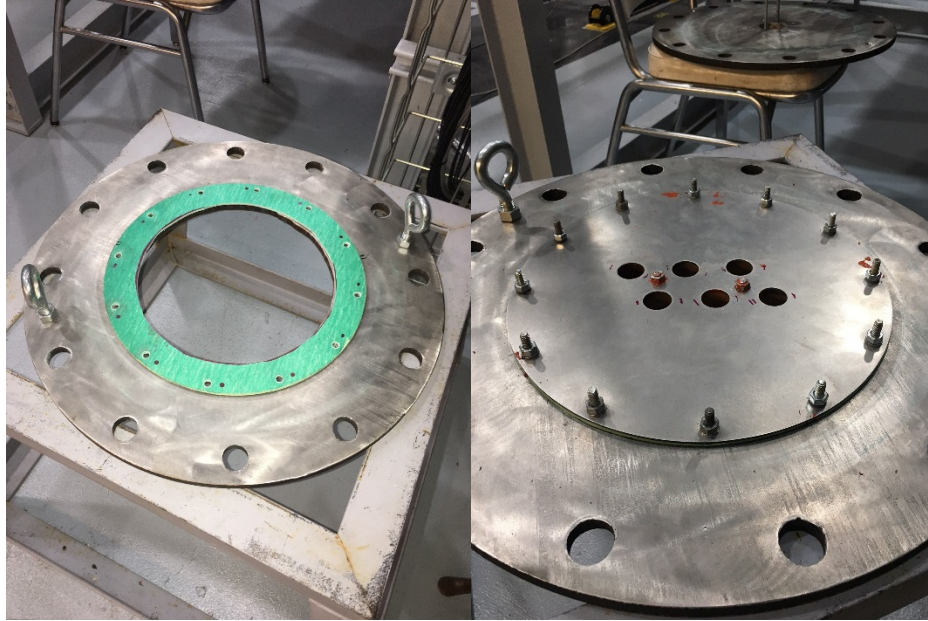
Six-element ceramic filter tube sheet with and without filter installed.
